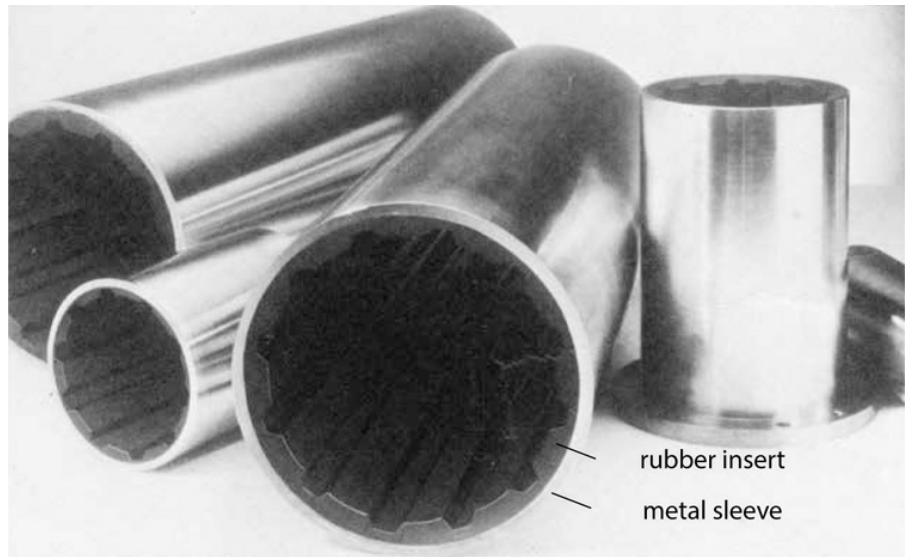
A. Cutless bearings. (BF Goodrich)
